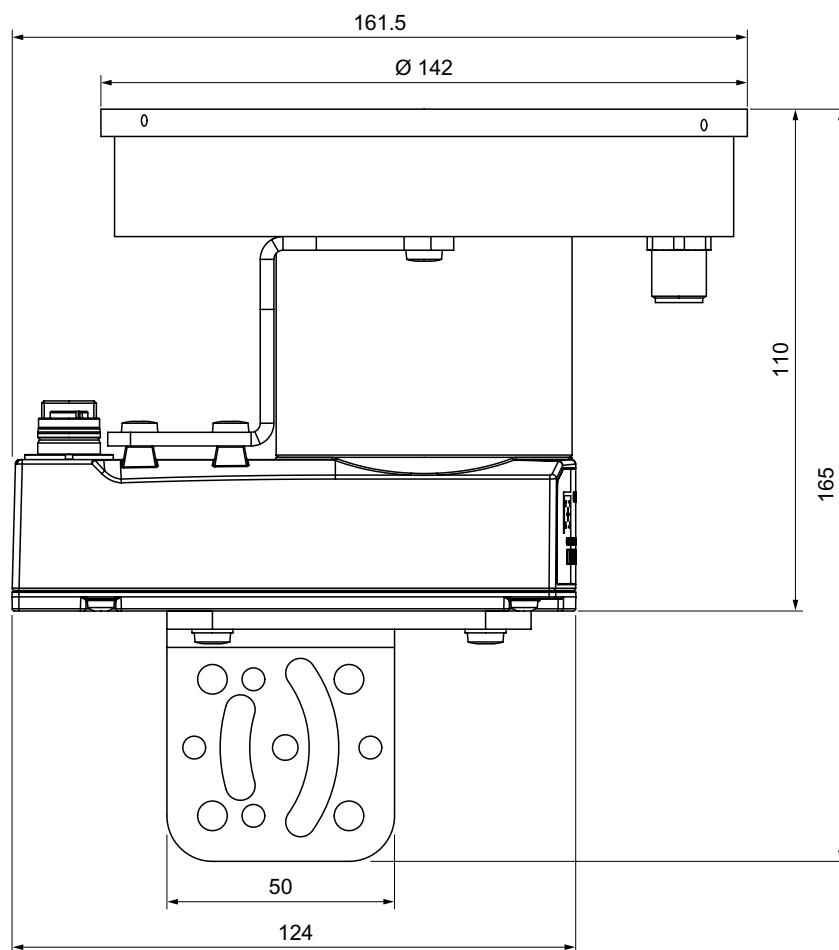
SIMATIC MV500 optical reader with external ring light and mounting plate
